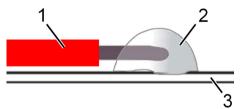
Solder connection [2] of stranded wire [1] and electrode [3]
